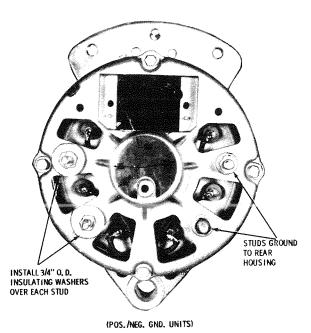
PLACEMENT OF EXTERNAL INSULATORS
